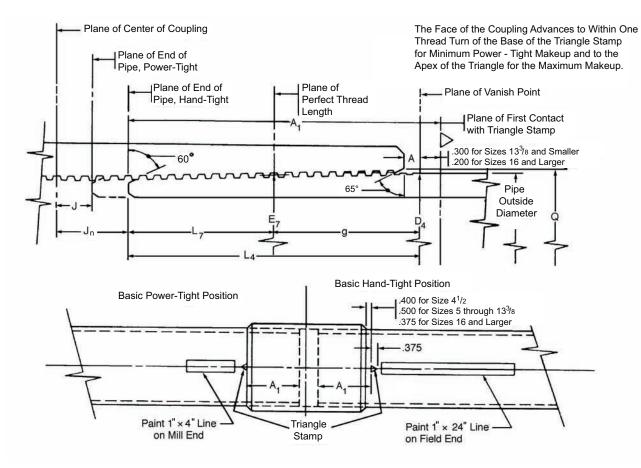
Basic Dimensions of Buttress Casing Threads Hand-Tight Make-Up (See Figures 6 and 7 for detail of thread form and dimensions.)
